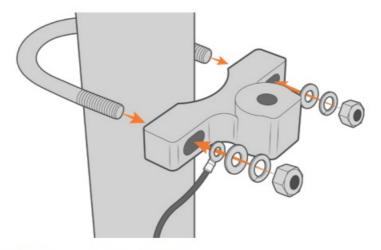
PM2 bracket installation. Insert the socket head cap screw and tighten it using a 5/16" hex driver.
